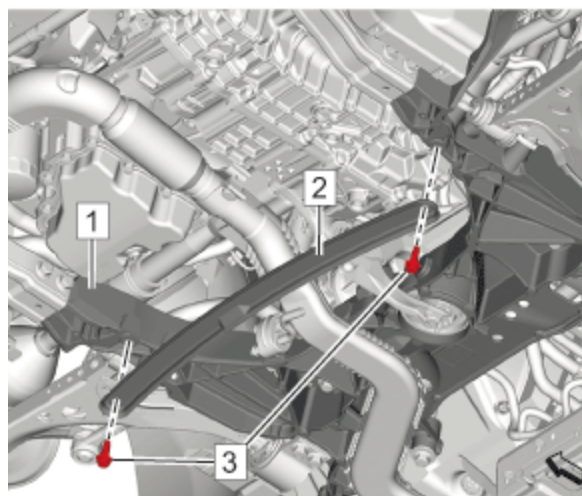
Drivetrain And Front Suspension Cradle, Brace And Bolt
